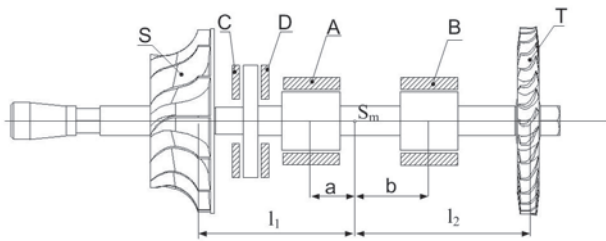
Schematic model of a compressor drive unit rotor assembly, including a system of sliding bearings. A, B- radical bearing bush, C, D- axial bearing thrust disc, S- compressor, T- turbine, own study based on [7]
